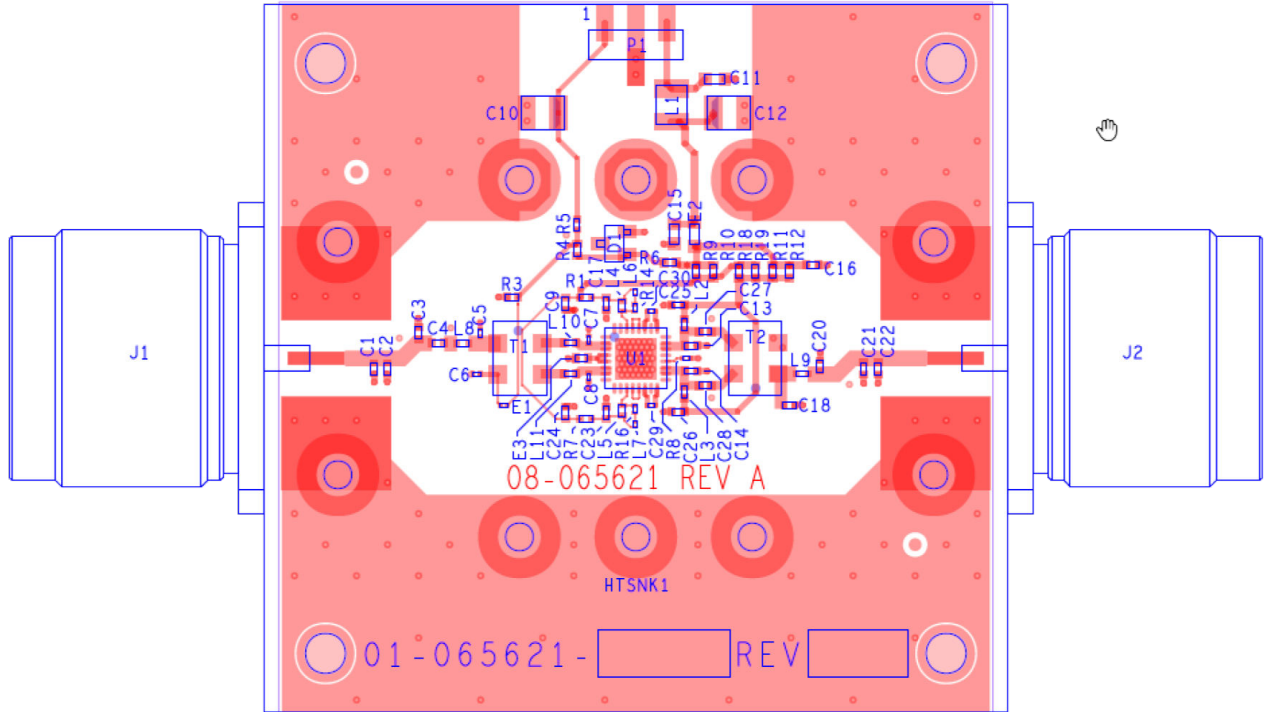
ADCA5191-EVALZ Assembly Drawing (Top Side)
